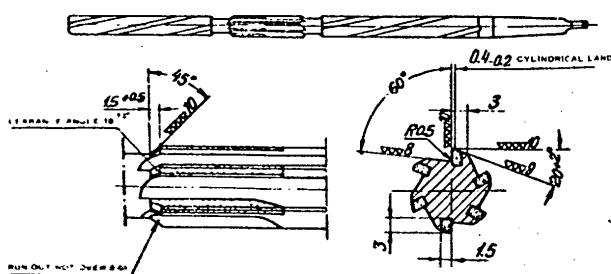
REAMER T-05 1258 FOR INLET VALVE GUIDE
